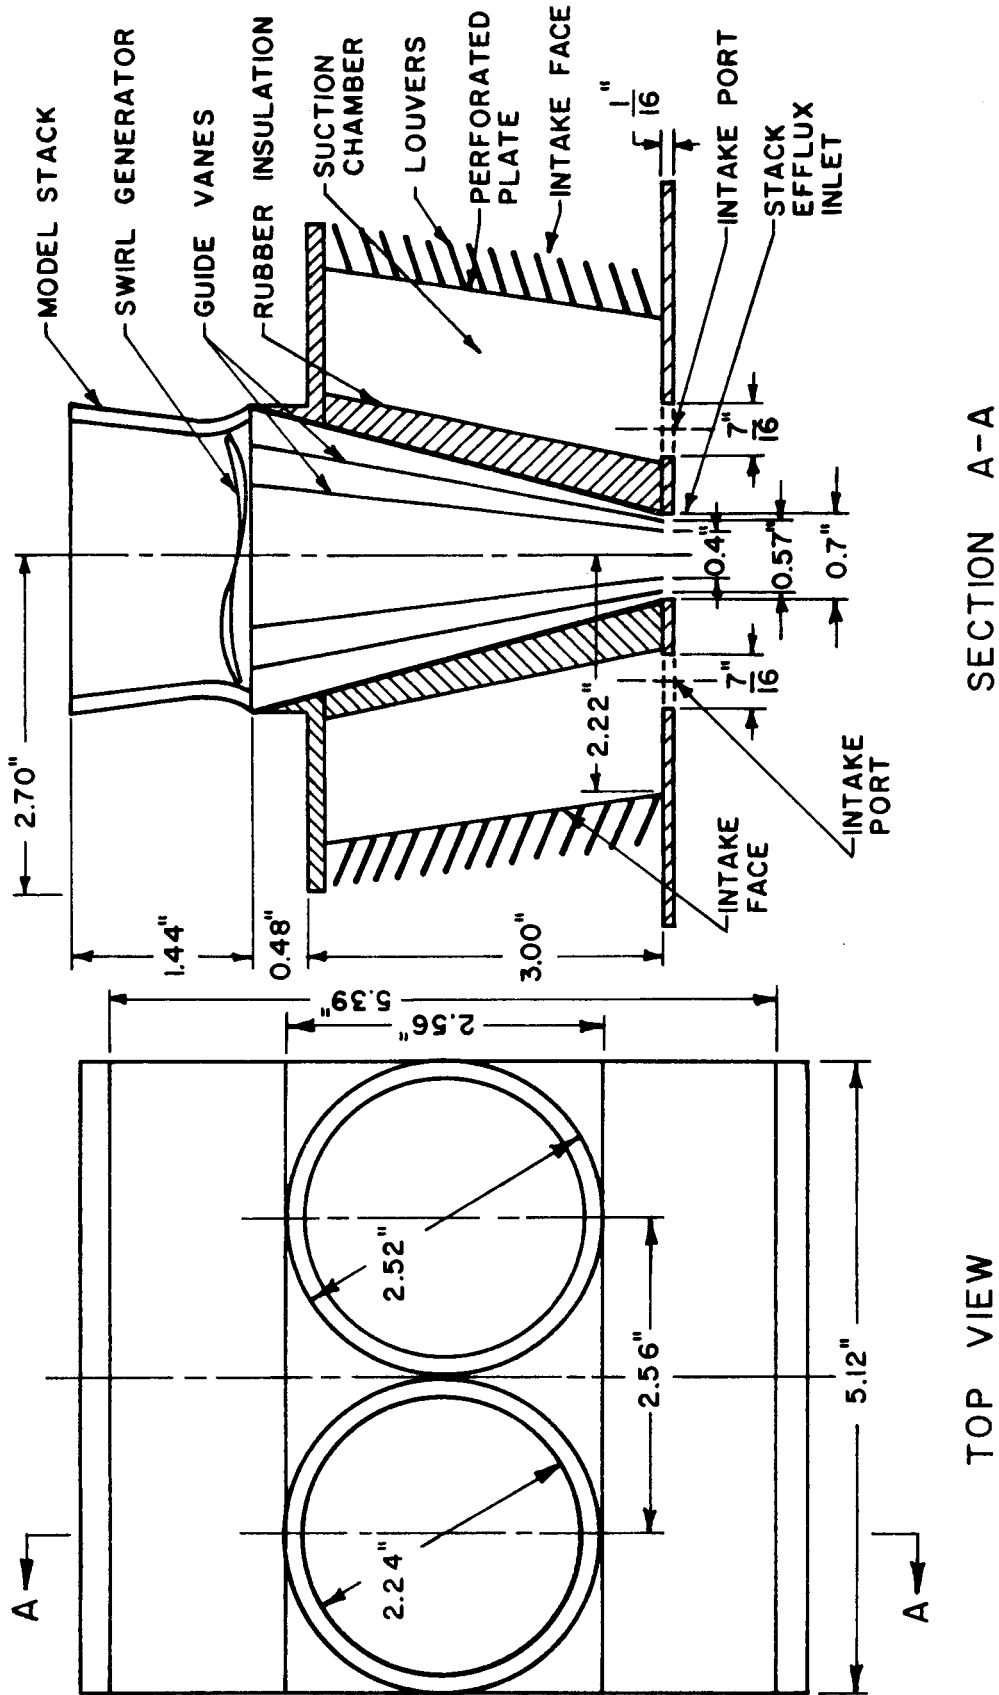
Details of a 1/150-scale (2-32-18) tower.
